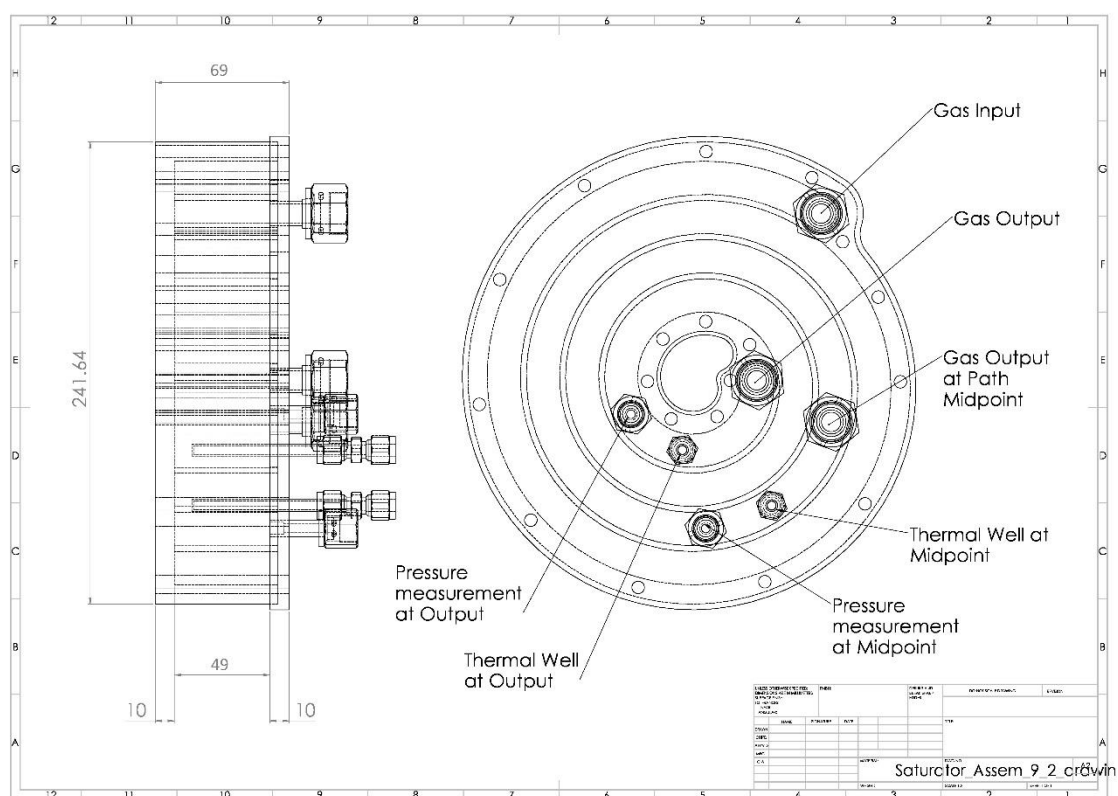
Drawing of final saturator with dimensions in millimetres.
